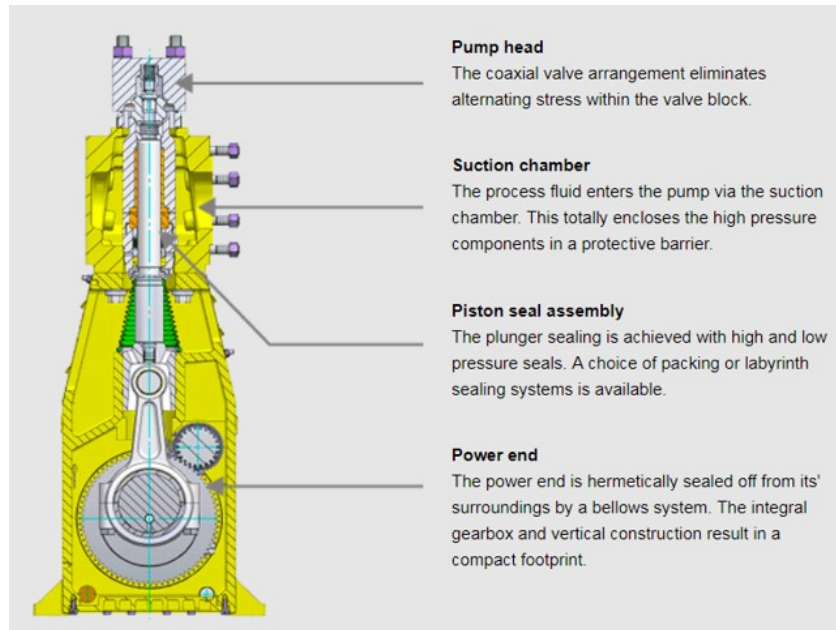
Details about the Hammelmann high-pressure fuel pump. [22]
